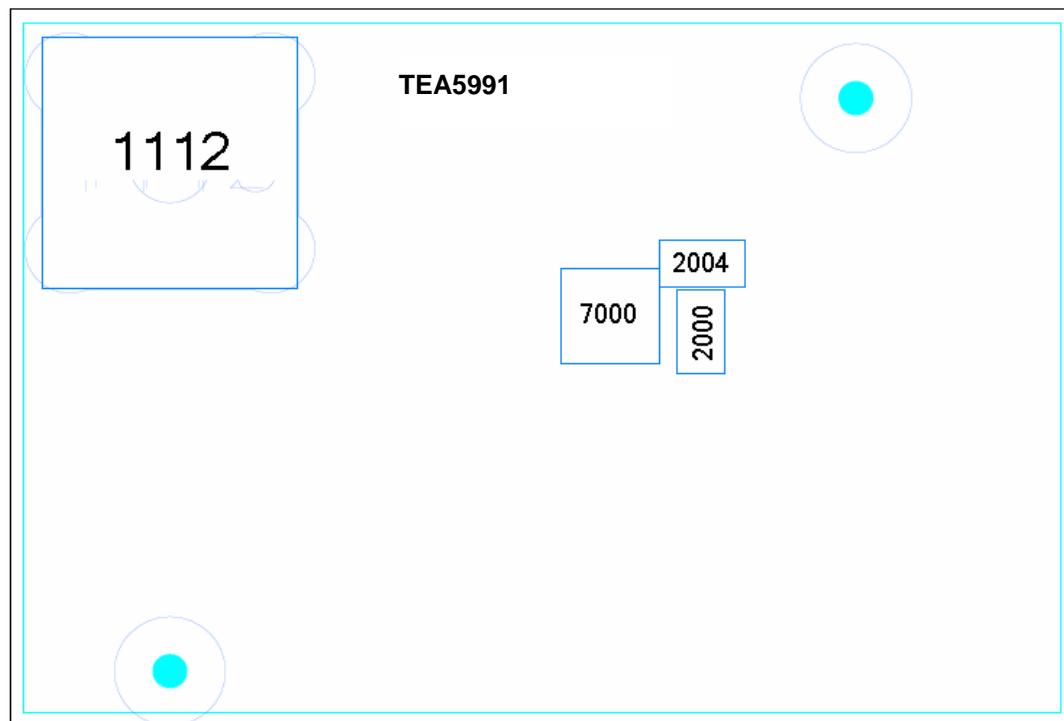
GH1183 demo board (WL-CSP package); component placement of the top-side (SMA connector 1112, FM-radio 7000 + decoupling caps 2000 & 2004).
